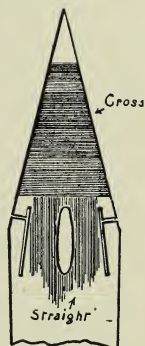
Showing "straight" and "cross" grinding of a Pen.
